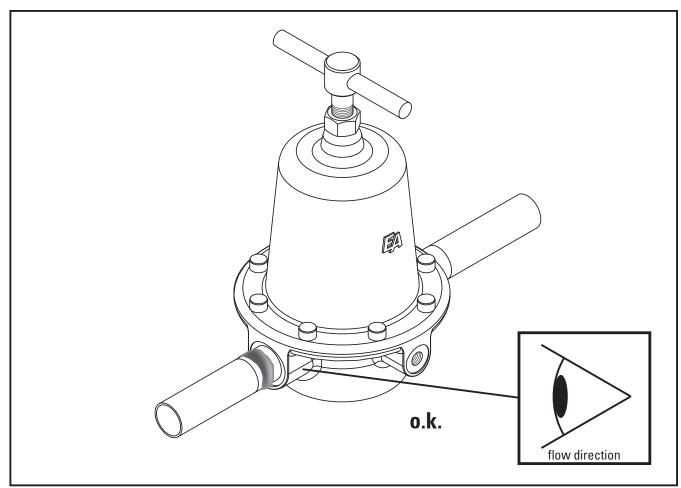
pressure reducer, mounting, welded connection, use of heat absorbing paste (Fig. Art. DM330362).
